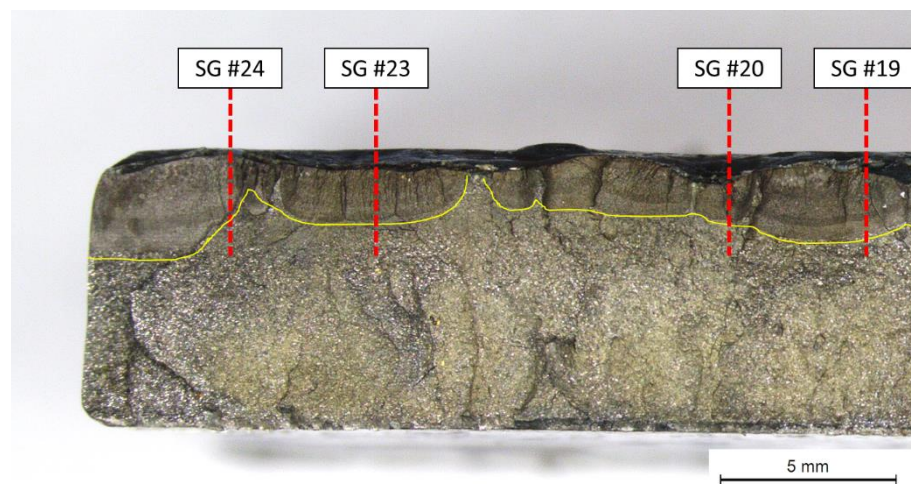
LQ_T14 - Fracture surface showing an edge crack detected by SG #24, amongst other fatigue cracking left of the edge of the specimen.
